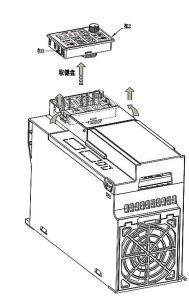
Removal of operating panel [New product] (keypad) Figure 3-5 Removal of operating panel [New product] (keypad)
